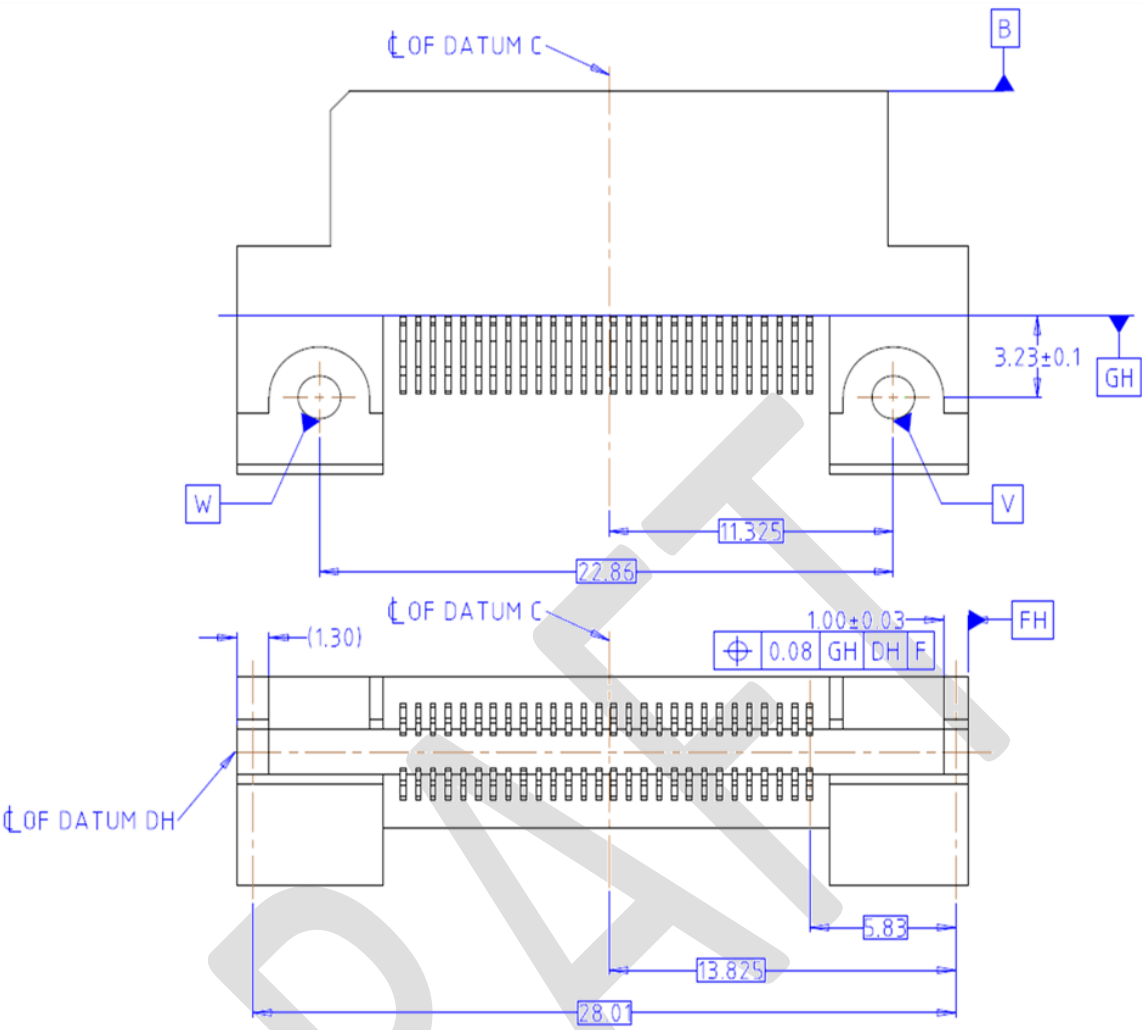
1C STRADDLE MOUNT CONNECTOR DIMENSIONS – REAR VIEW (MM)
